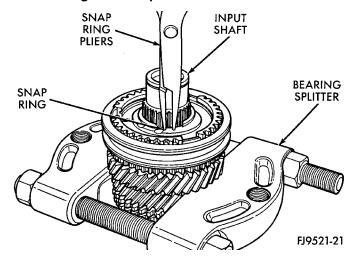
5th Gear Synchronizer Snap Ring Installation
